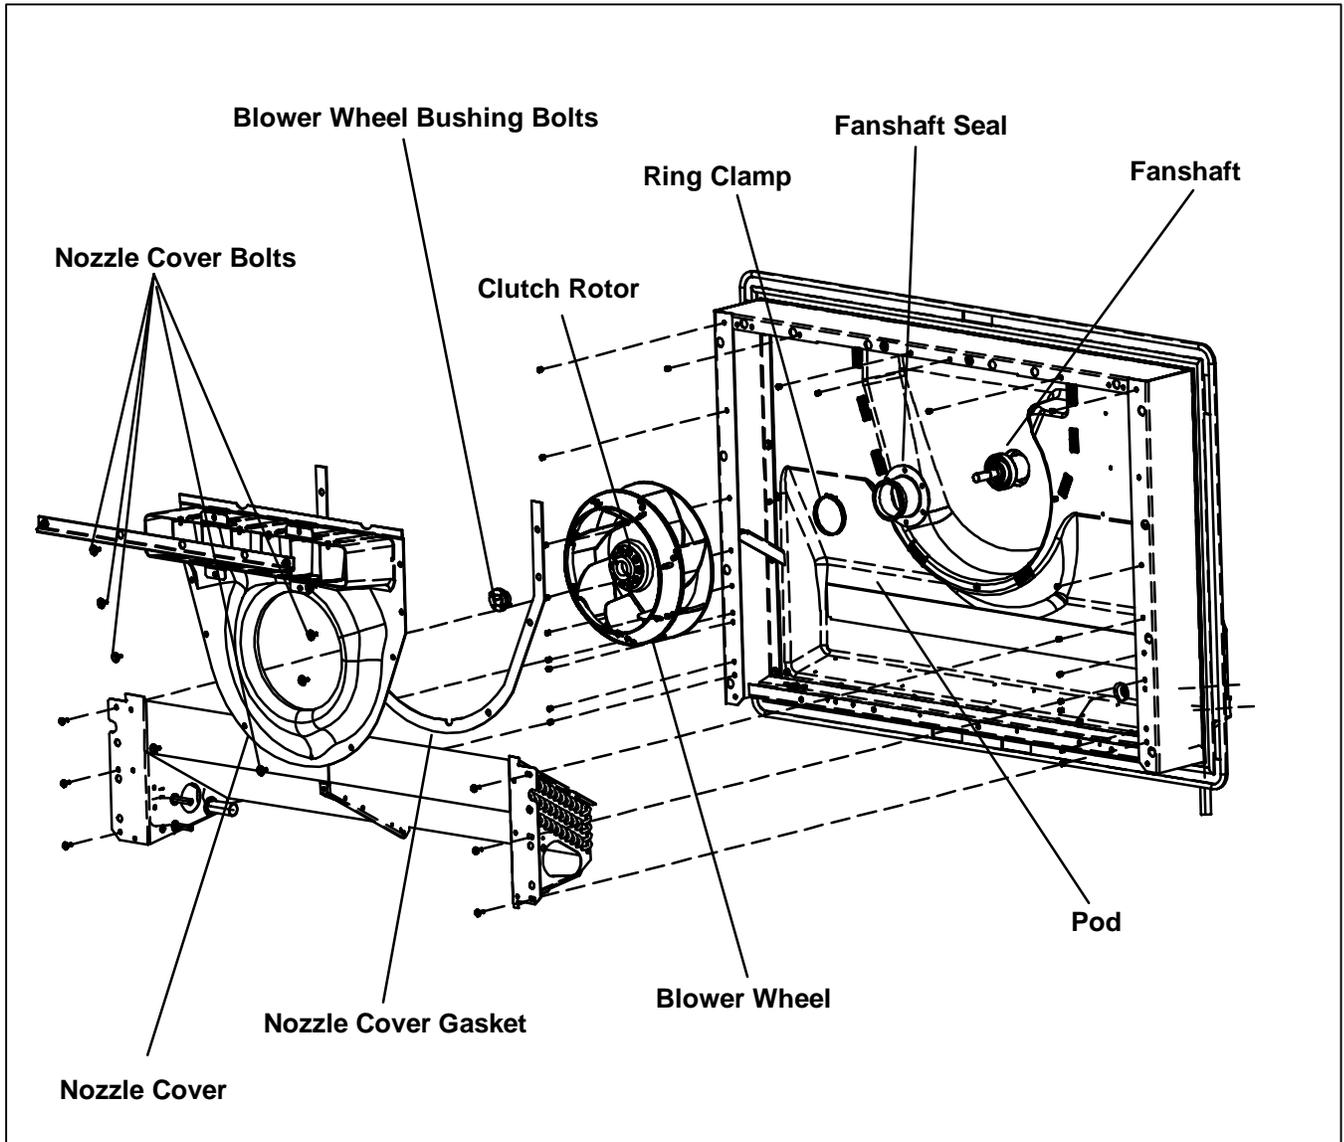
Blower Wheel And Nozzle Cover Assembly
